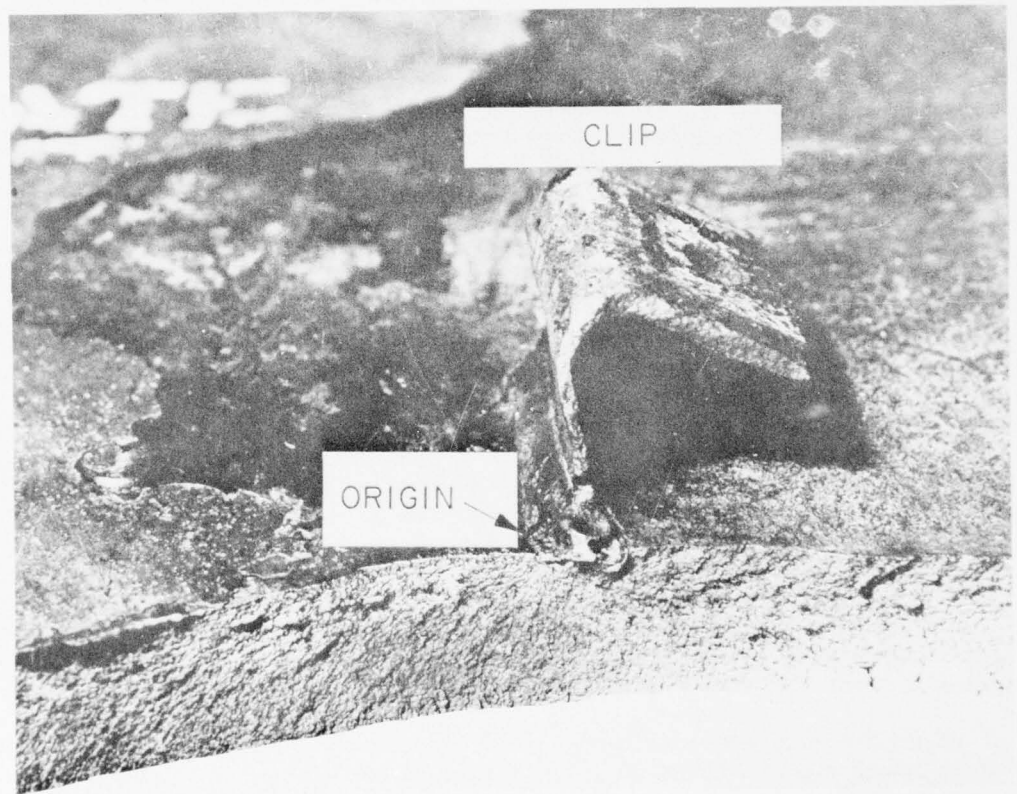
Ship fracture origin due to a minor weld for attaching a clip. A great many structural failures of pearlitic steels have been traced to minor welds or accidental arc strikes.
